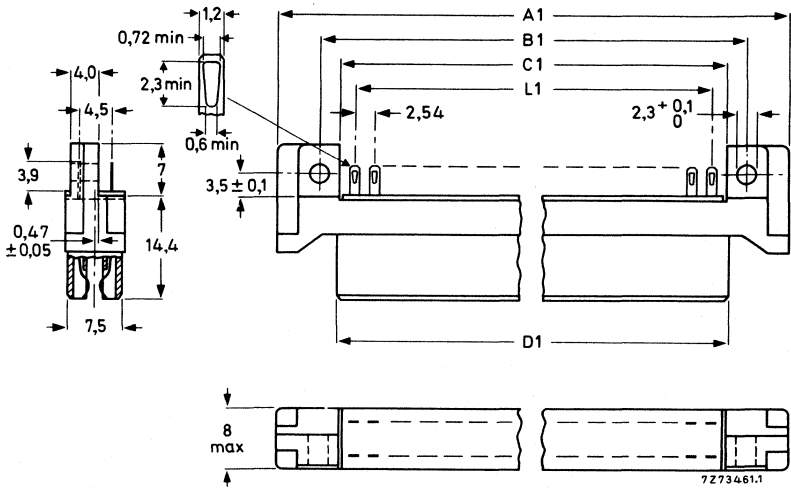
Female part with solder tags with eyelet; see Table 2 for dimensions A1, B1, C1, D1 and L1.
